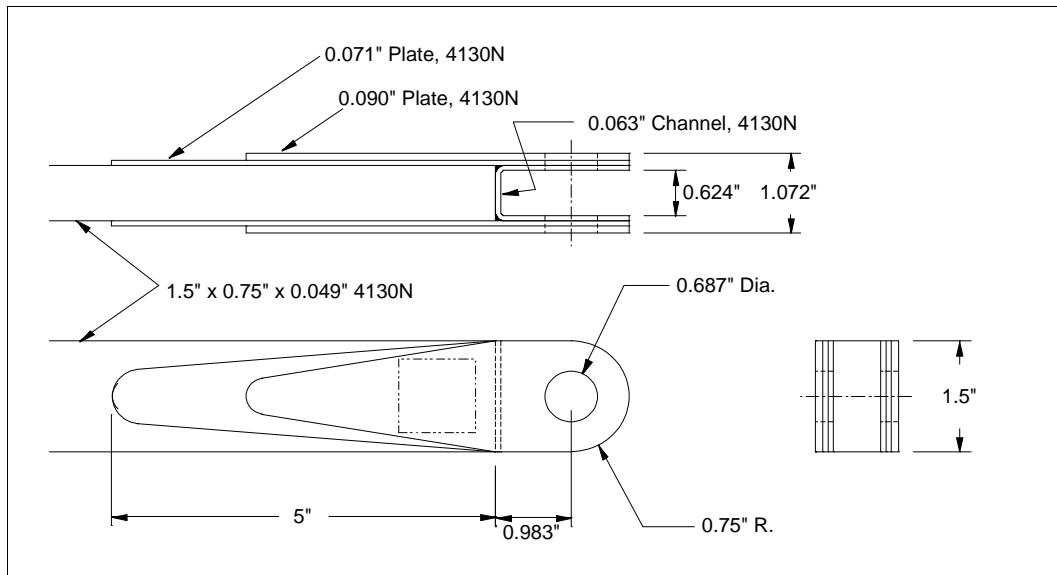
Fuselage Attachment Fitting, Aft Wing Spar.
